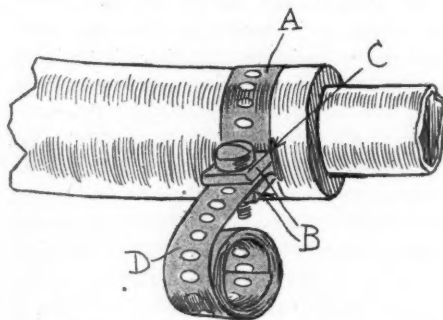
TURNER UNIVERSAL HOSE CLIP
